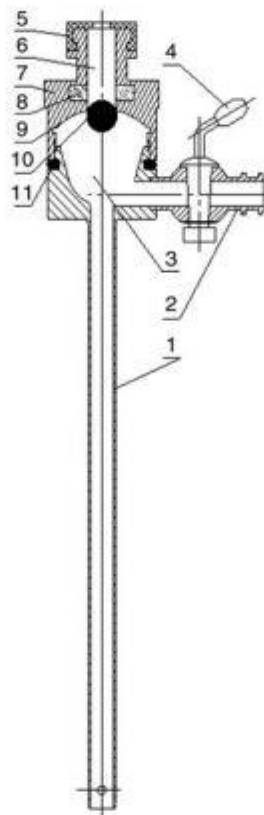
Parts of the patented sheath. (1) Metal sheath; (2) side suction tube; (3) funnel-shaped internal cavity; (4) valve of side suction tube; (5) sealed cap; (6) sealed working passage; (7) sealed lid; (8) permanent magnetic ring; (9) hemisphere surface; (10) magnetic steel ball; (11) sealing soft ring.
